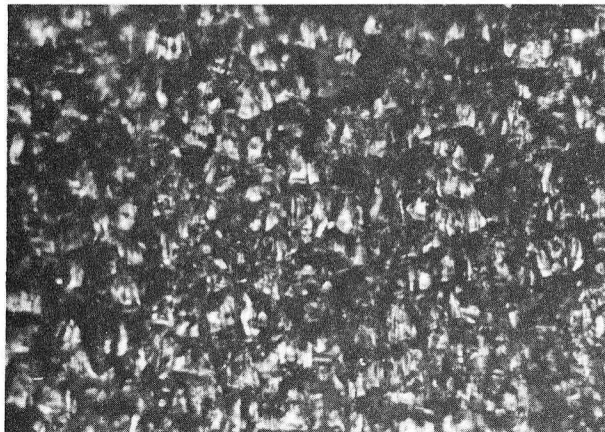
Fracture surface of polystyrene SEN specimen. Test conditions: room temperature (300°K) and 0.2 cm/min.
